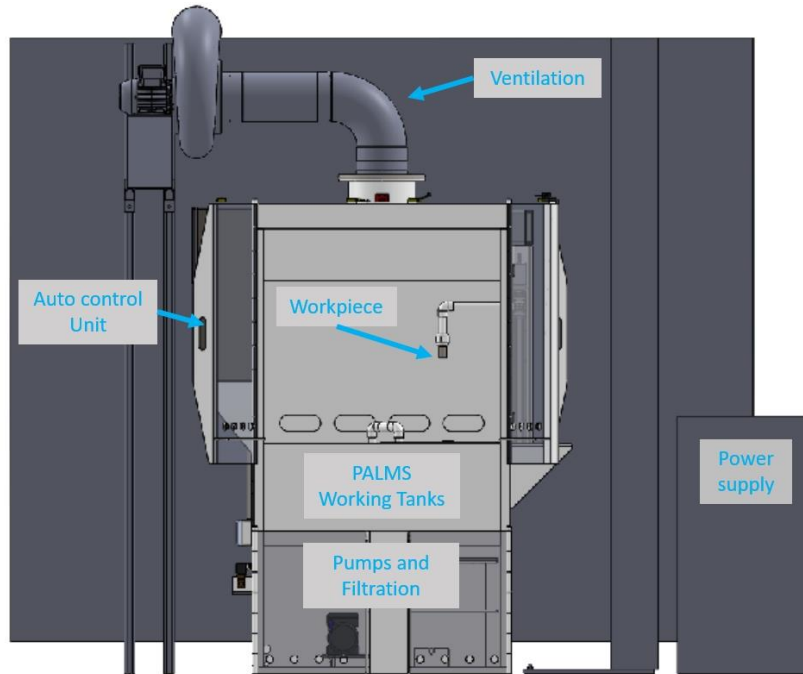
PALMS Industrial Prototype Machine Configuration for Additive Manufactured Components
